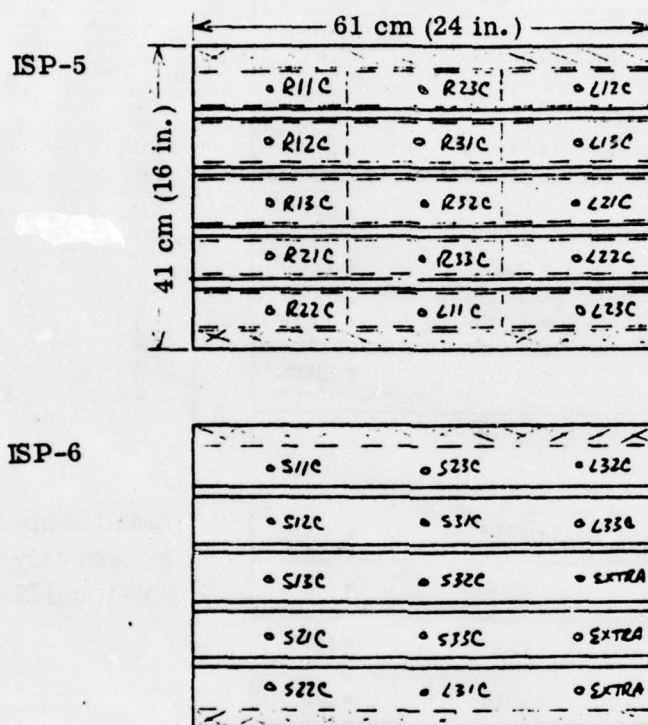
I-Stiffened Impact Panels - Specimen Layout (Cont'd)
